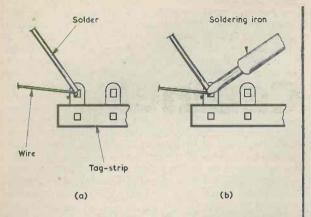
(a). When soldering a wire to a tag, as here, it is helpful to initially place the end of a length of solder against the wire and tag (b). The soldering iron tip is then placed against the end of the solder
